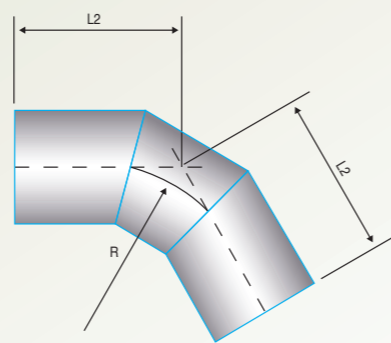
Gusseted bend type 2 over 30° up to 60°
